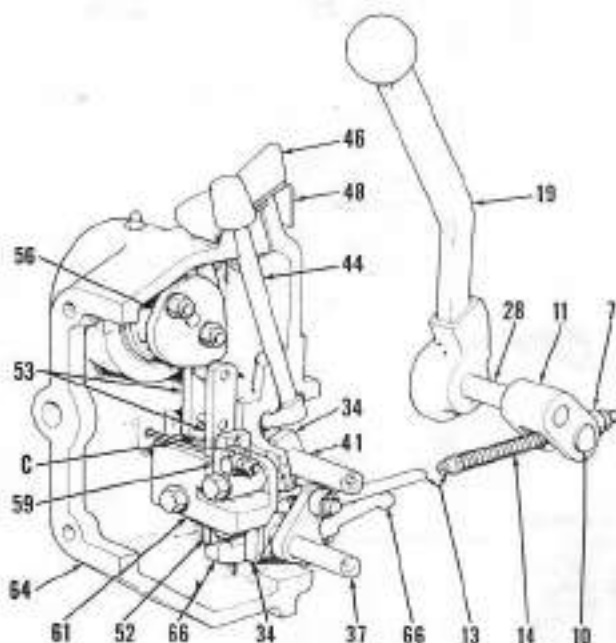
Exploded view of hydraulic system control mechanism that is mounted in rockshaft right hand support bracket (84). Note that connecting rod (13) is also shown in Fig. 304. Refer also to the assembly view in Fig. 306.
